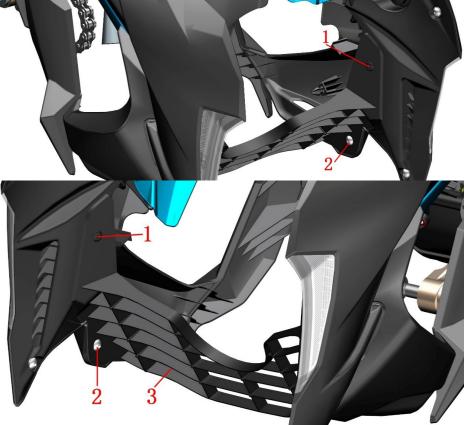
FUEL TANK COVER COMPONENT		Decorative cover grill	CHK	Q
